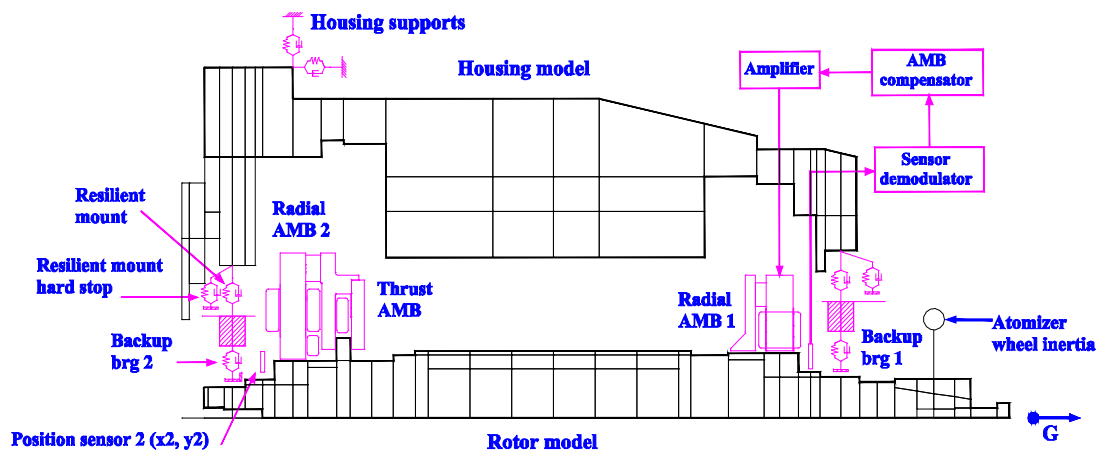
System model includes rotor, housing, AMB, and backup bearing. Atomizer model is shown rotated 90 degrees counter clockwise.
